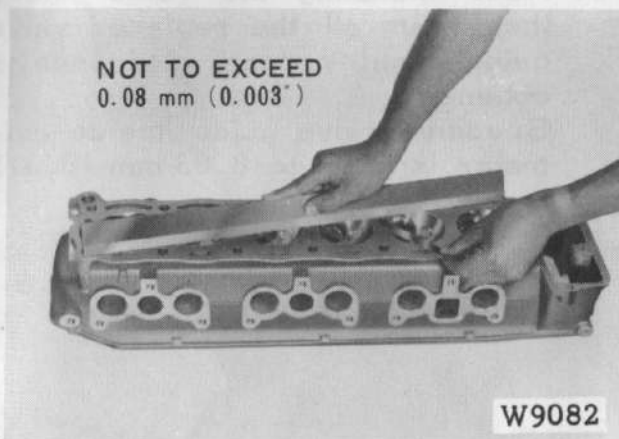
Cylinder Head Surface Flatness Inspection
